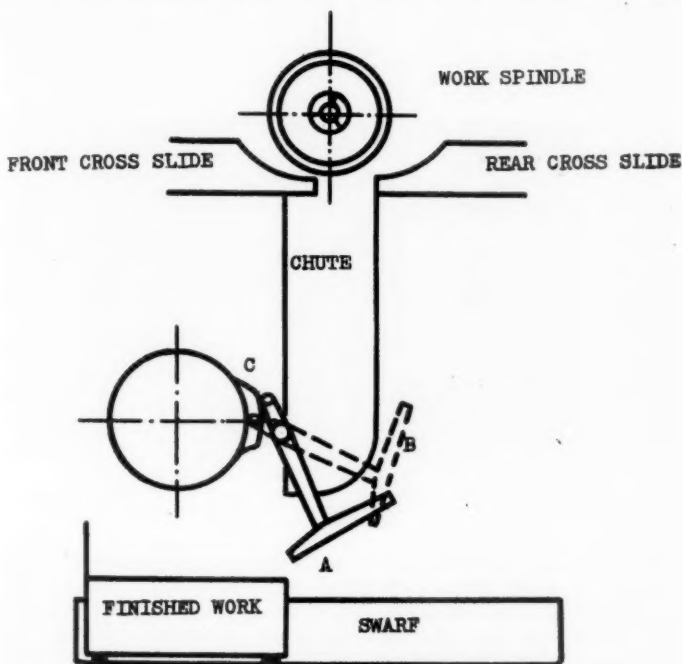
Cam operated deflector for separating workpieces from swarf.
